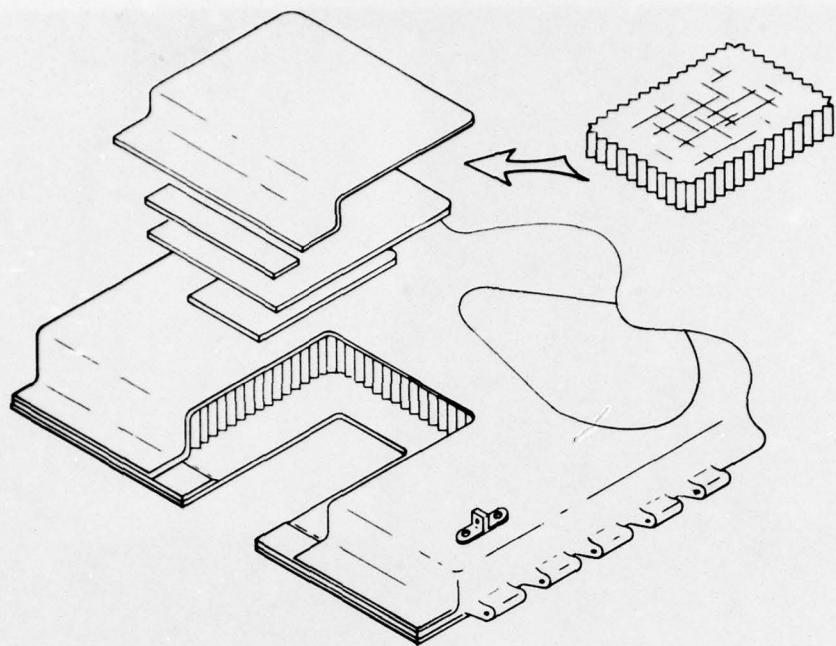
Exploded View of Repair Details for the T-38 Main Landing Gear Door
